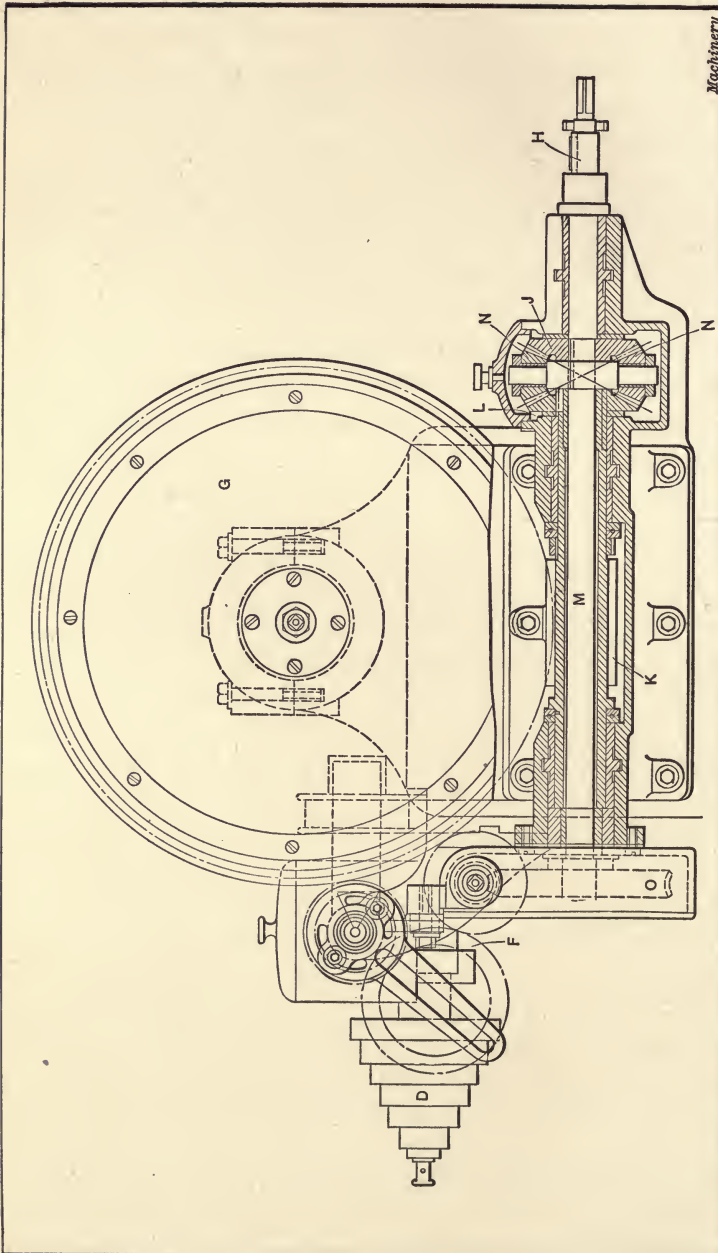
Section through Reinecker Universal Gear Cutting Machine showing the Differential Mechanism
